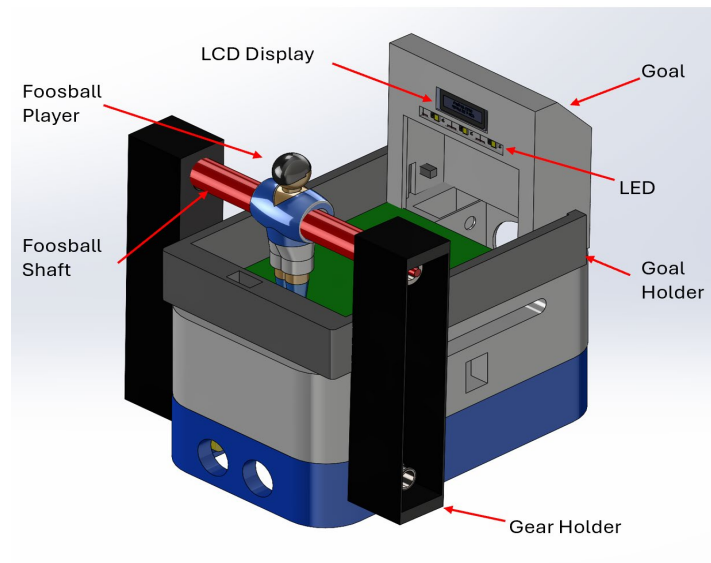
SolidWorks assembly model of the initial design. The foosball table design is shown with multiple 3D-printed parts assembled. The main body (in gray) housed the microcontroller and related circuitry.
